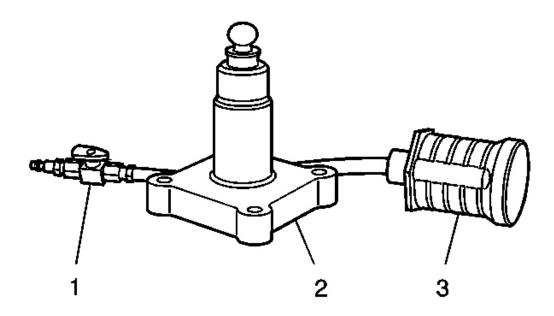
Cylinder Liner Trimming Tools View (1 Of 2) Courtesy of GENERAL MOTORS CORP.
